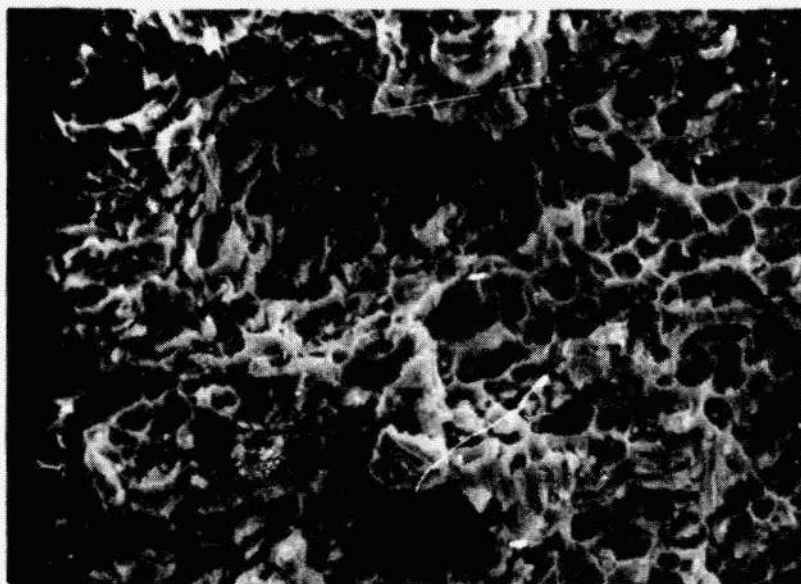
Electron beam weld fracture surface (x500).
